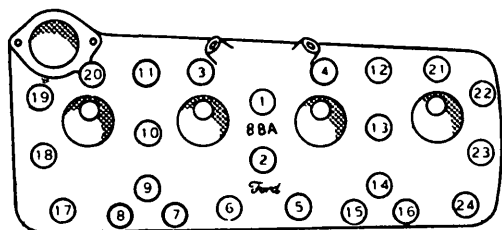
Cylinder head tightening sequence, 1949-52 V8 Ford and Mercury
